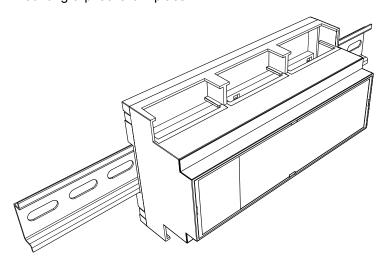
Enclosure mounted on DIN rail (circuit board not shown)
